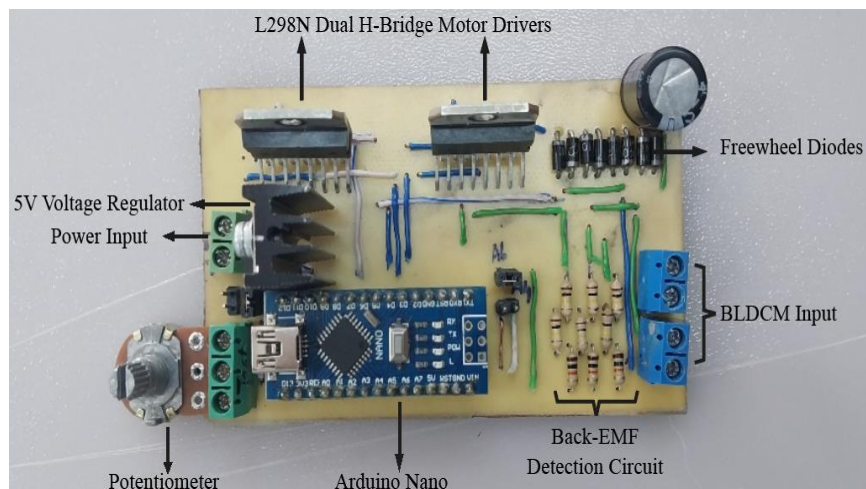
BLDC motor drive circuit (FDAM sürücü devresi)
